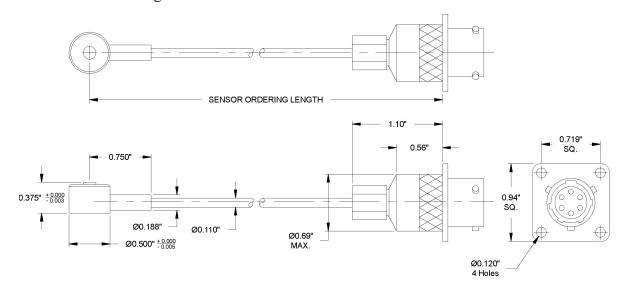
T-412, T-413, & T-414 Button Style Sensor Dimensions
